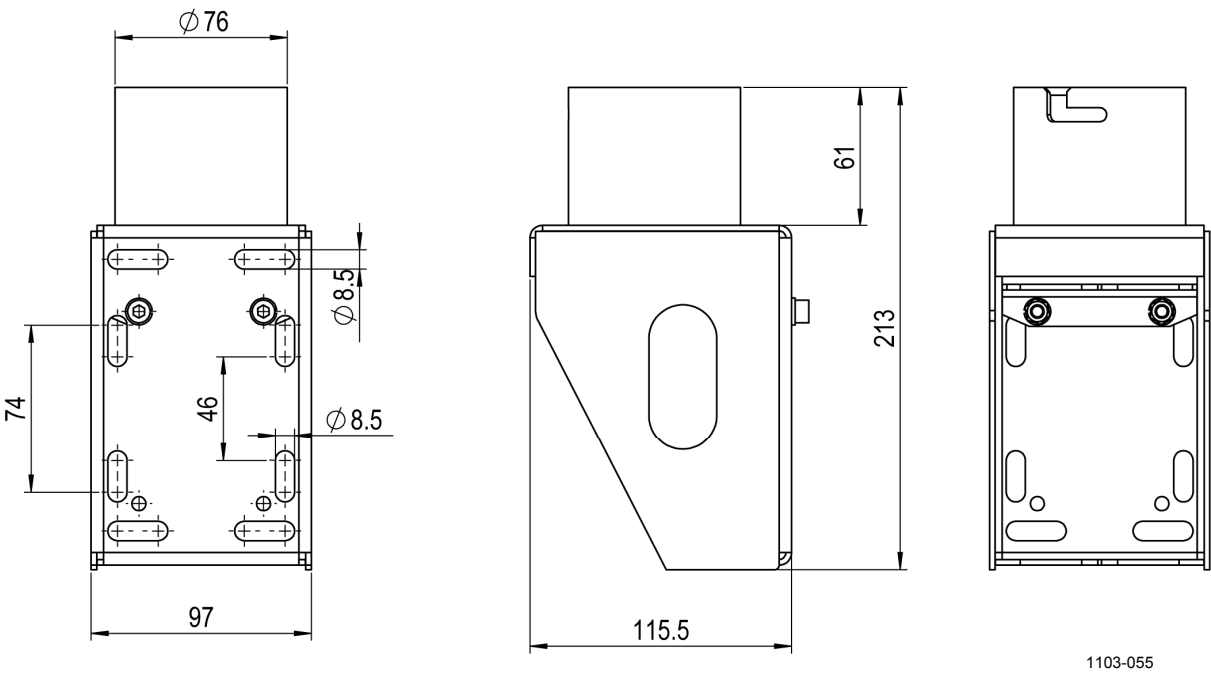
FIX70 Mounting Kit Dimensions in Millimeters
